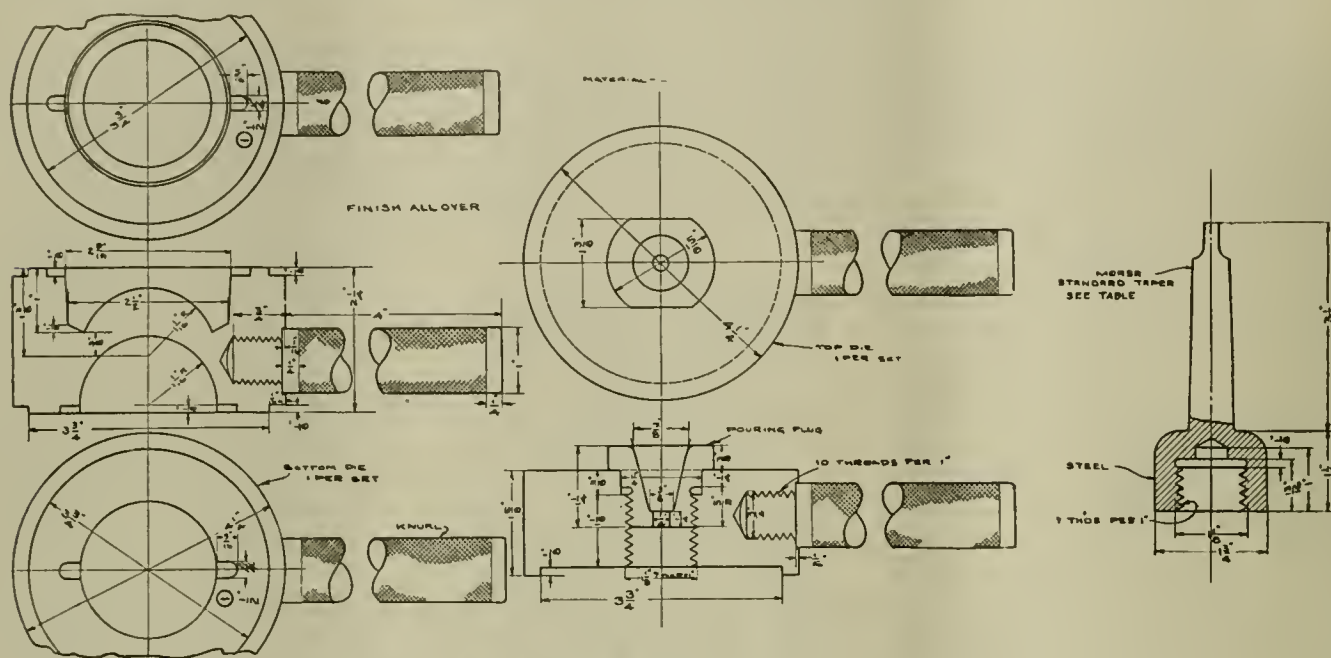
DETAILS OF MOULD AND HOLDER FOR SOFT METAL GRINDERS.
